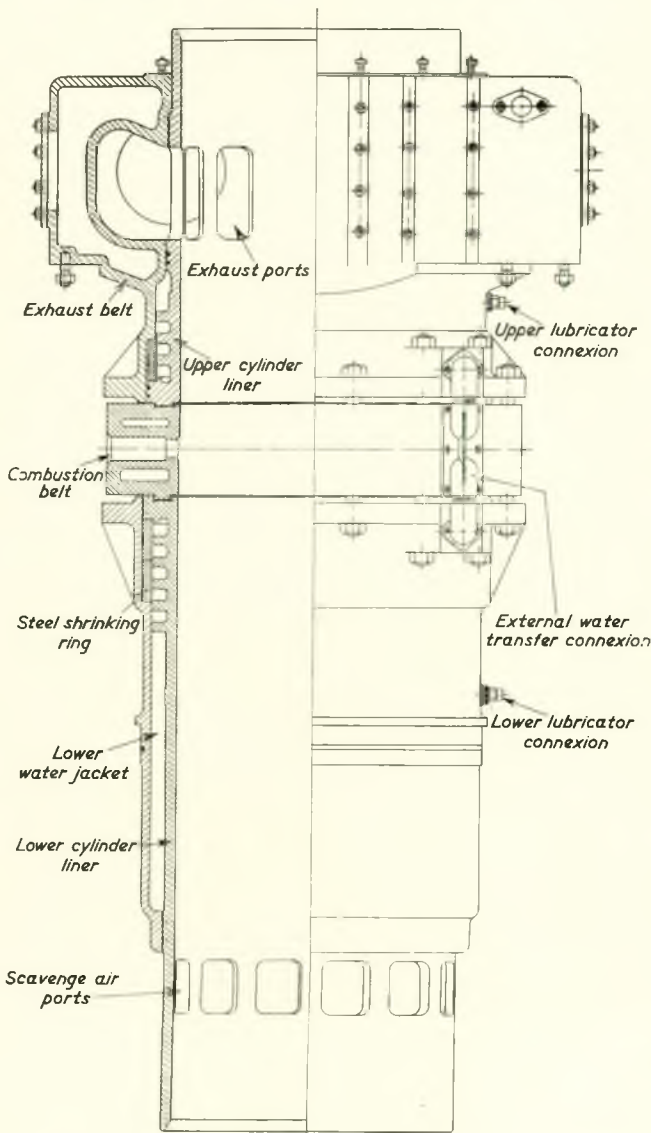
Drawing of the cylinder liners, jackets, combustion chamber and exhaust belt assembly
